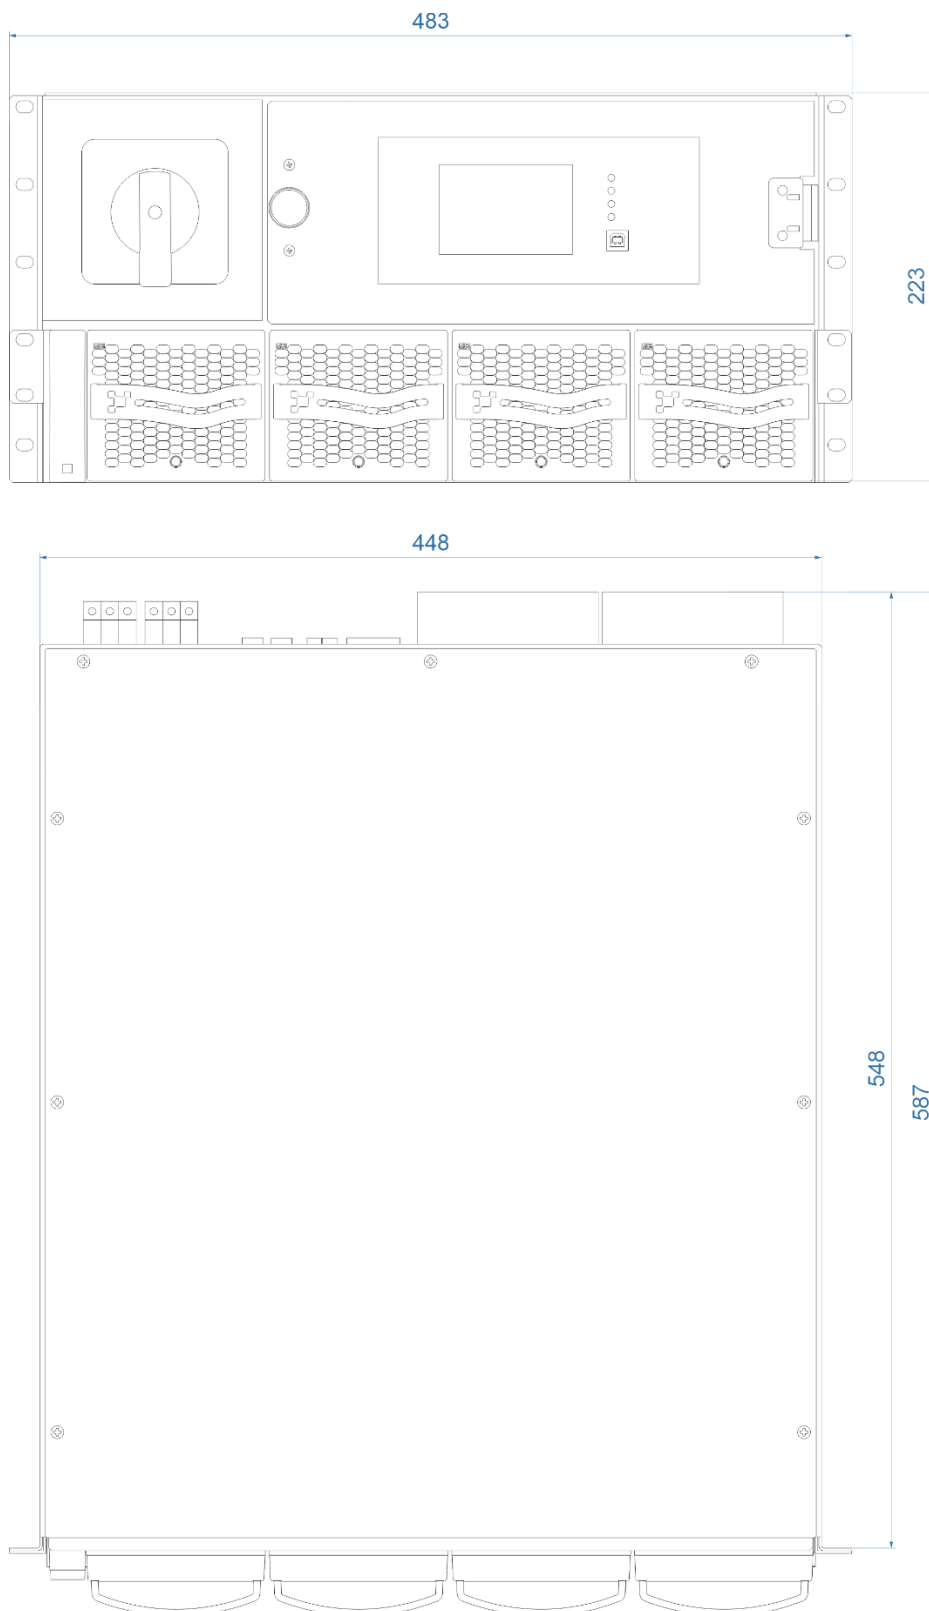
View and overall dimensions of the ZDSO-230V power supply.
